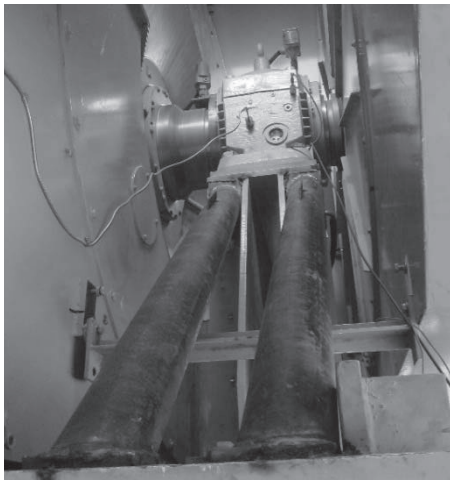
Welded supports in the NDE motor's bearing.
